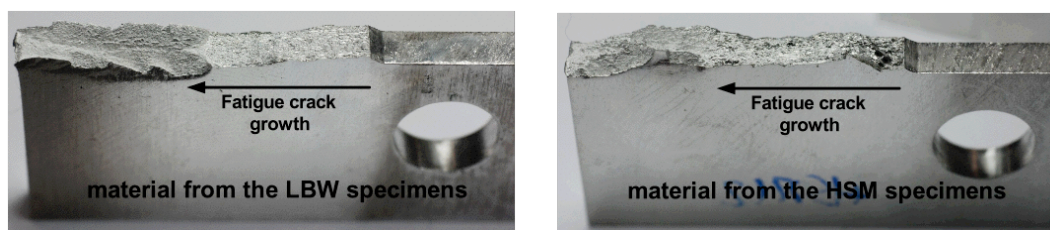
Fracture surface of CT specimens in both material conditions
